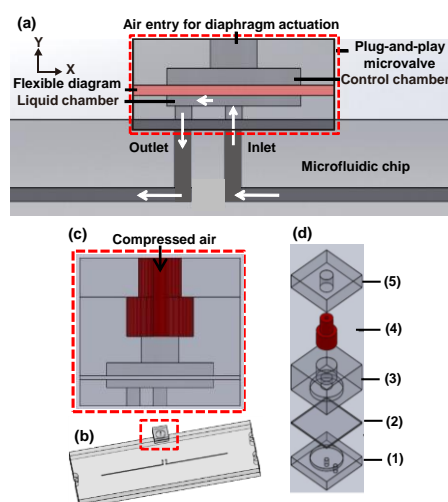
(a) Concept design of the plug-and-play microvalve for integration with thermoplastic microfluidic chips, (b) schematic of the microvalve-chip assembly, (c) a cross-sectional view of the microvalve with an embedded connector, (d) an exploded view of the microvalve: (1) bottom component to accommodate liquid chamber, (2) TPU flexible diaphragm, (3) intermediate component to accommodate the air chamber and the embedded connector, (4) the embedded connector and (5) top component
